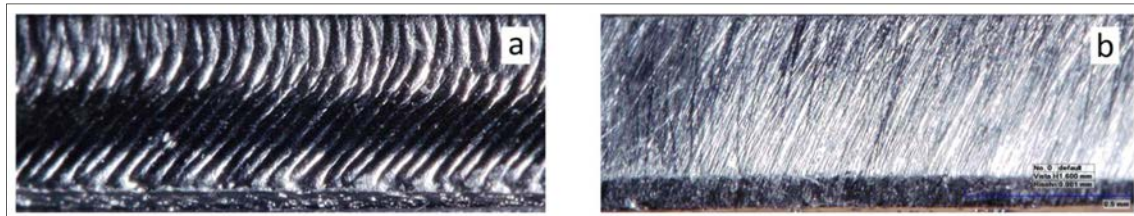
3D surface reconstruction (specimens A): (a) Surface in the as-built condition; (b) Smoothed surface.
